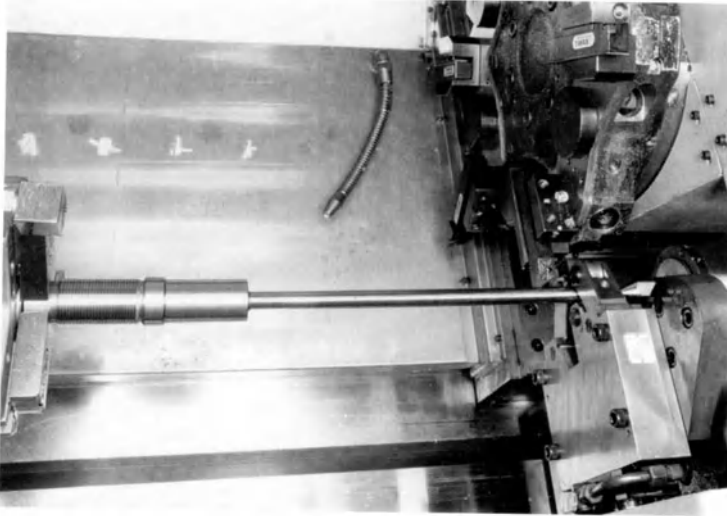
Supporting a long slender workpiece using a programmanle steady whilst the top turret turns the diameter. [Courtesy of Gildemeister (UK) Ltd.]
